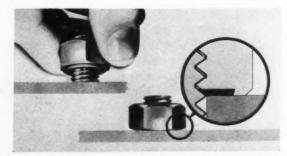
Nut is completely free on the screw until the final tightening torque is applied
